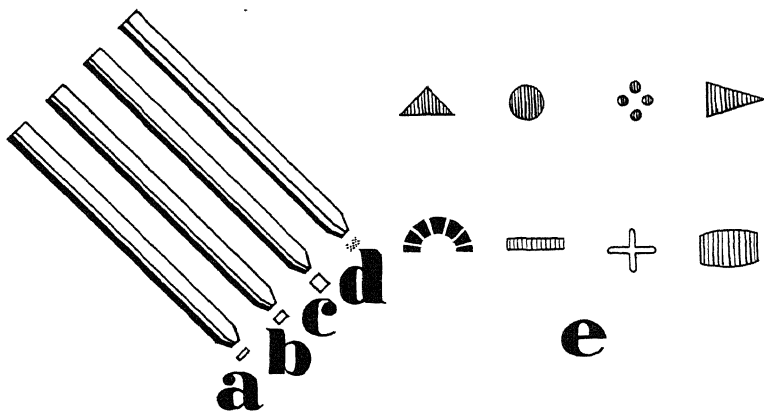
Chasing tools. (A) An outline tool. (B) A narrow raising tool. (C) A broader raising tool and (D) the background tool. (E) Additional suggestions of designs to be found on background tools
